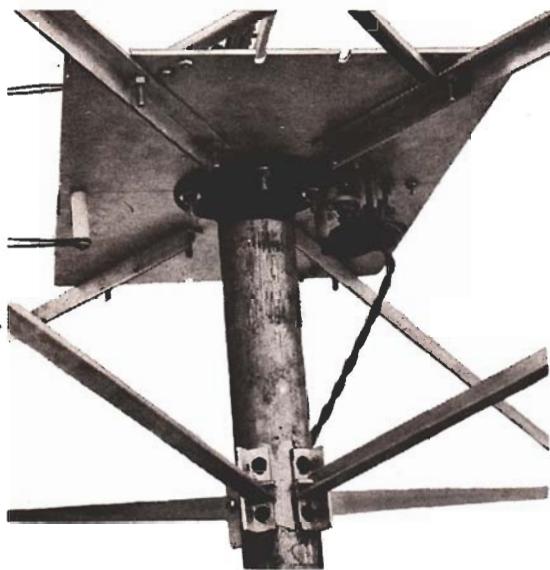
Bottom view of the aluminum mounting plate showing the braces attached to the pipe mast and matching stub insulator. The clock motor that drives the capacitor is mounted on metal pillars 3 inches from the center of the plate.
